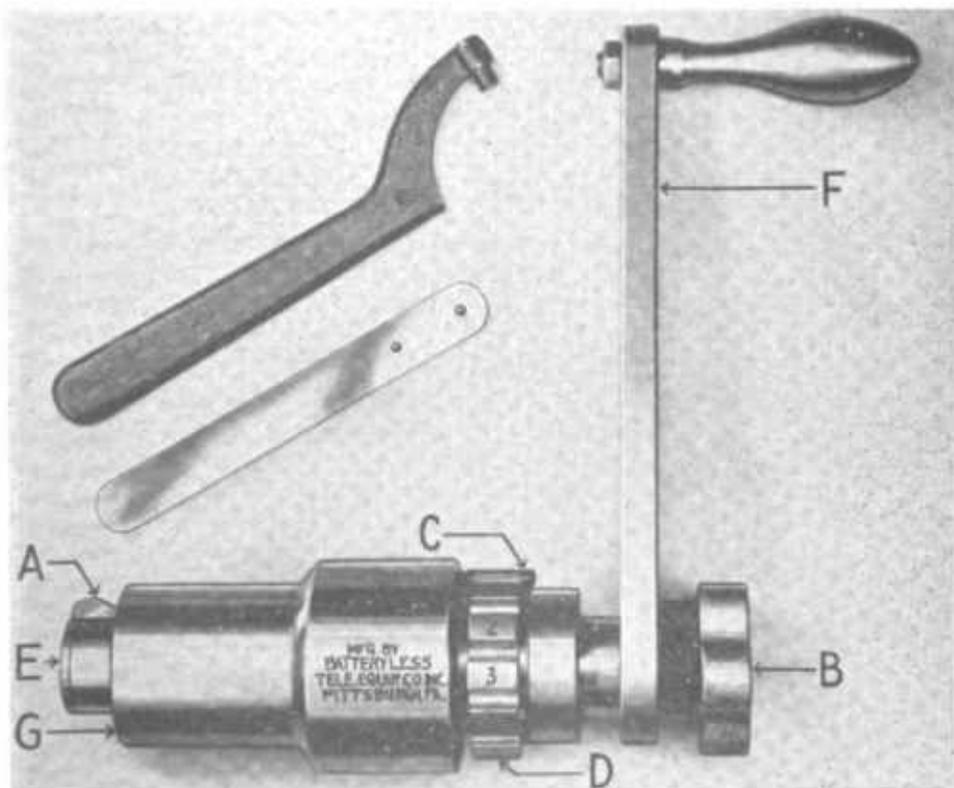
Grooving tool for installing air-regulating escape valve.
